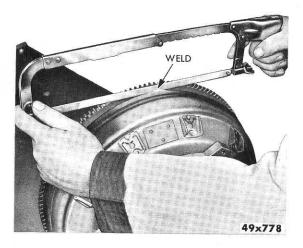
Cutting Ring Gear to Housing Weld Spots
